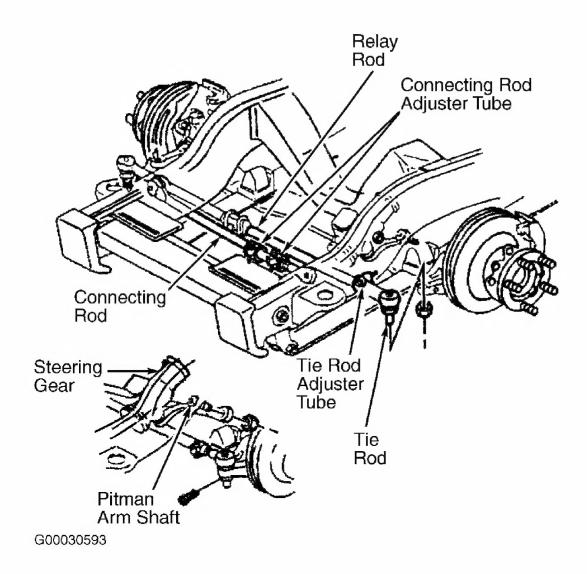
Exploded View Of Steering Linkage ("C/K" Series - "I" Beam Axle) Courtesy of GENERAL MOTORS CORP.
